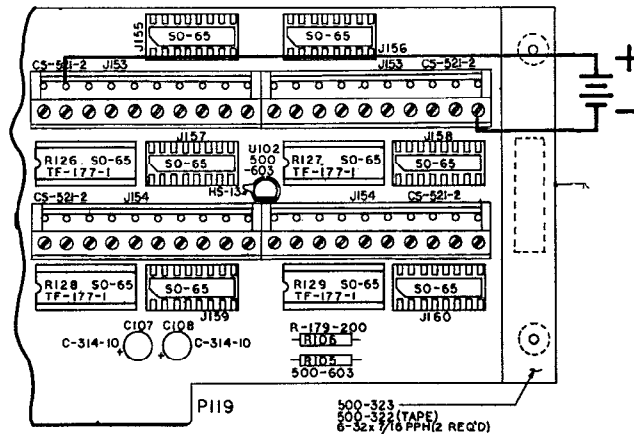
Typical AIM3 Single-ended Connections (Channel 0 shown)
